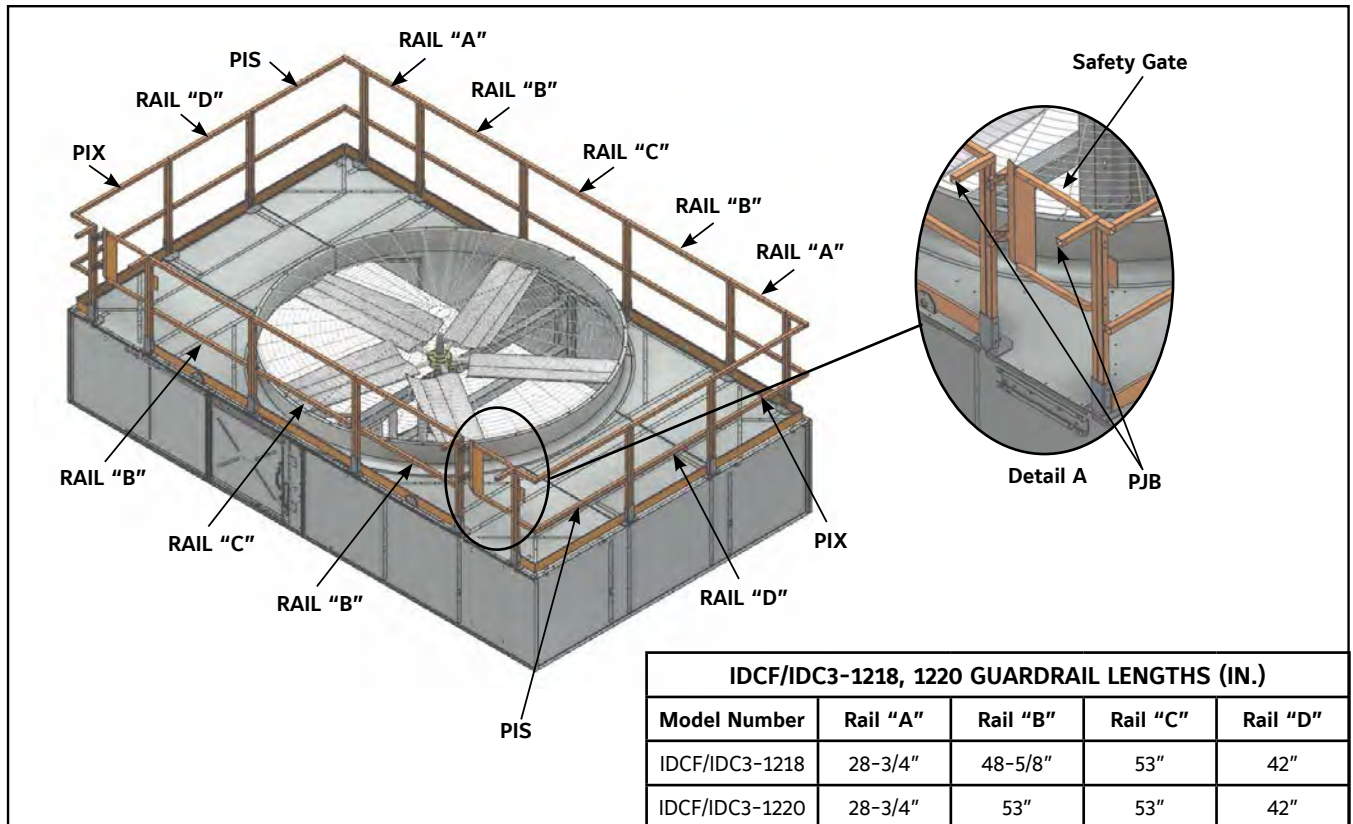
Top Perimeter Guardrails - IDCF/IDC3-1218, 1220
